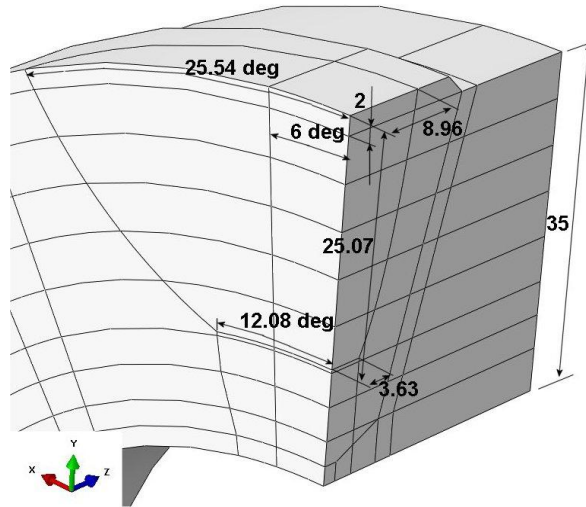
The geometry of the weld repair, dimensions in mm.
